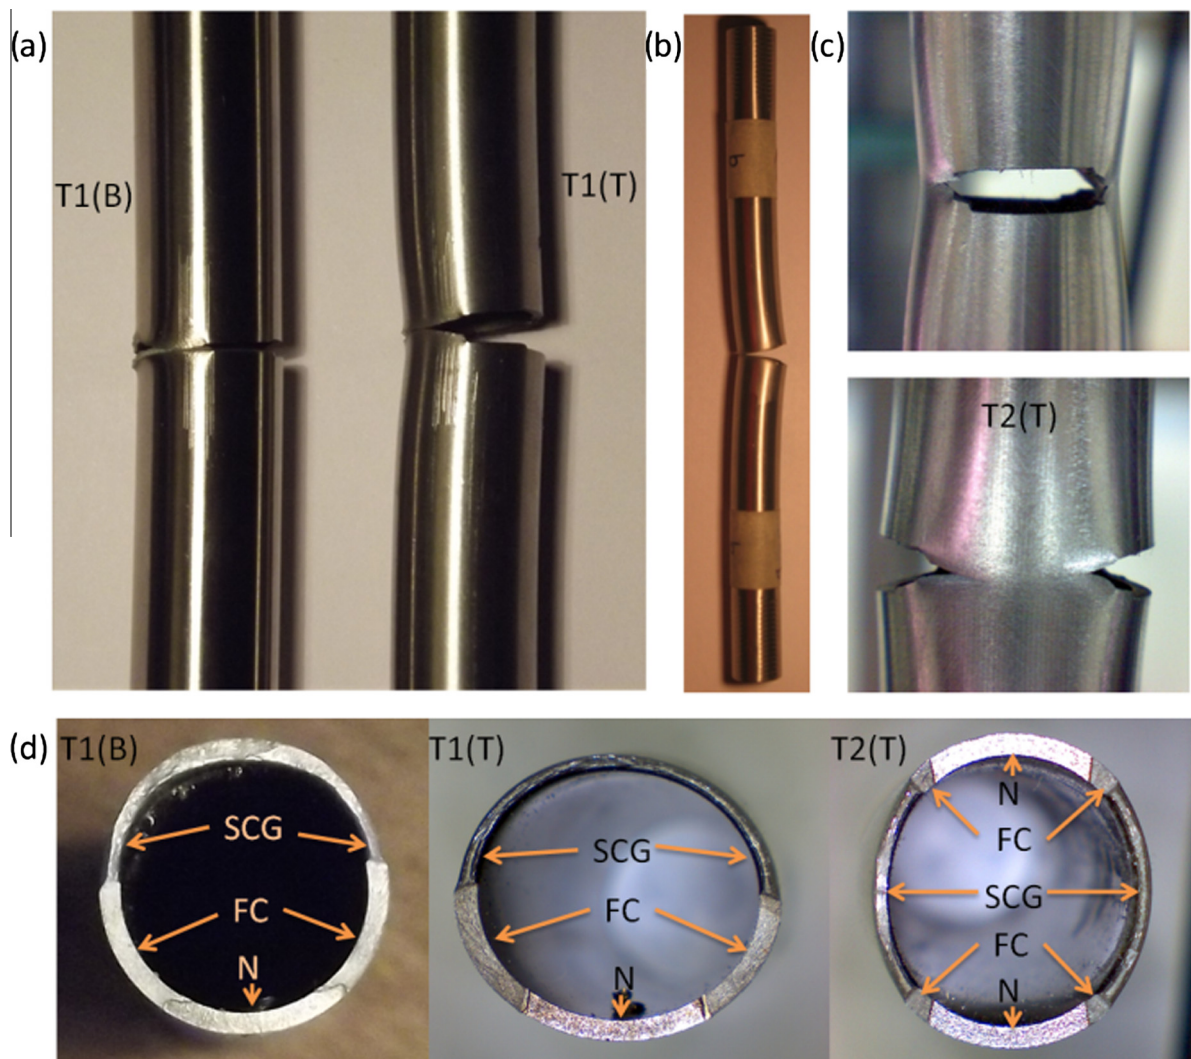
Macroscopic extension of plastic deformation and associated geometrical distortion in specimens with circumferential TWCs (N: electric discharge machining induced notch, FC: fatigue crack, SCG: stable crack growth).
